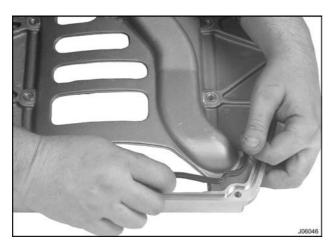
Installing a new upper oil pan gasket (lower face) (typical)
